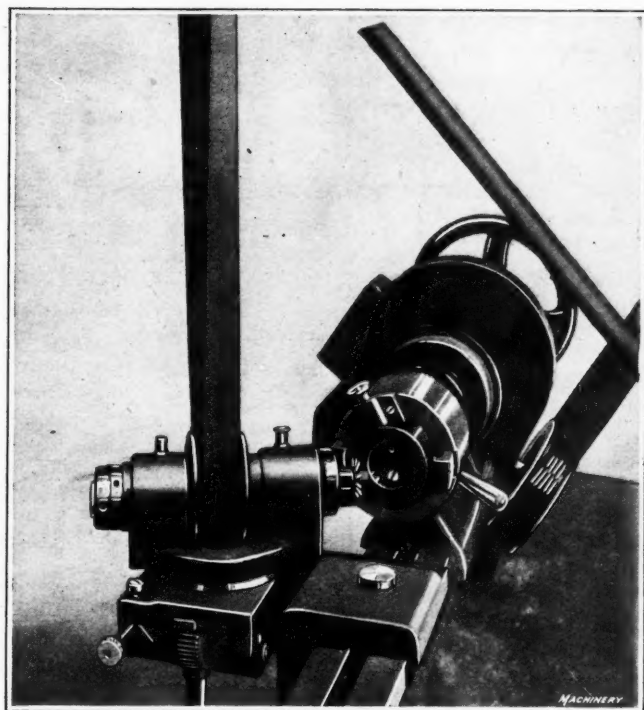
End View of Machine shown in Fig. 5 for roughing out Powder Train Groove
